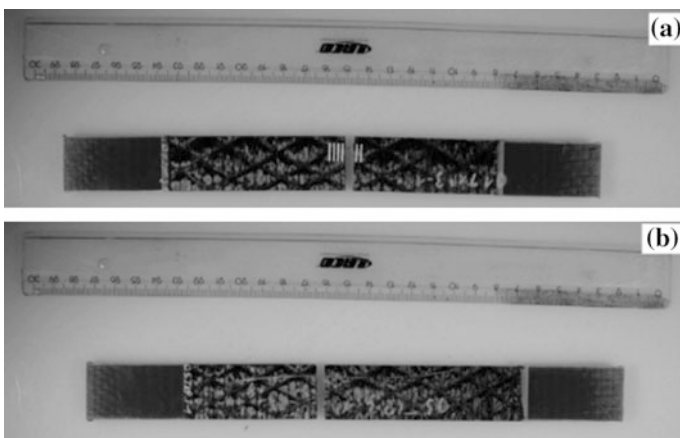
Tensile typical crack of the specimen T700 (a) and HTS40 (b)
